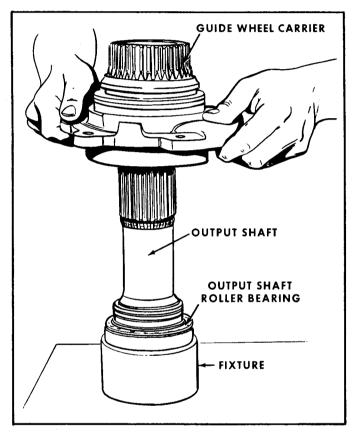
Installing the Guide Wheel Carrier on the Output Shaft.
